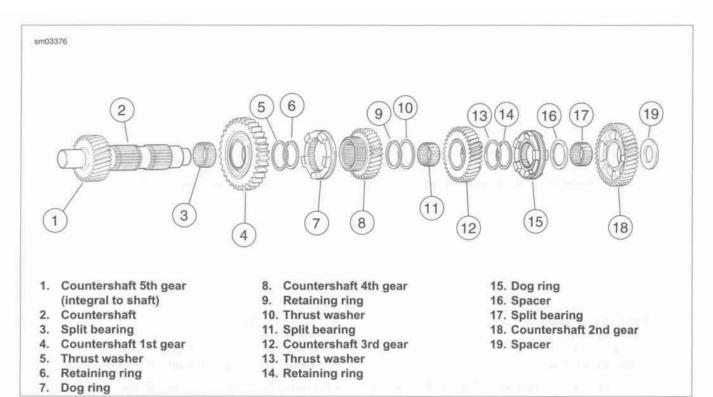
Transmission Countershaft Assembly Once Removed from Left Crankcase/Disassembly
